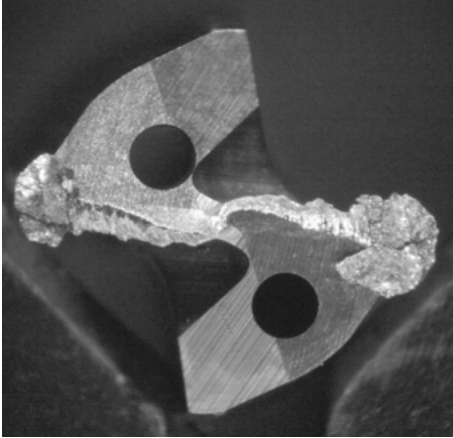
Excessive BUE on the rake face of a drill made of 10% Co carbide.
